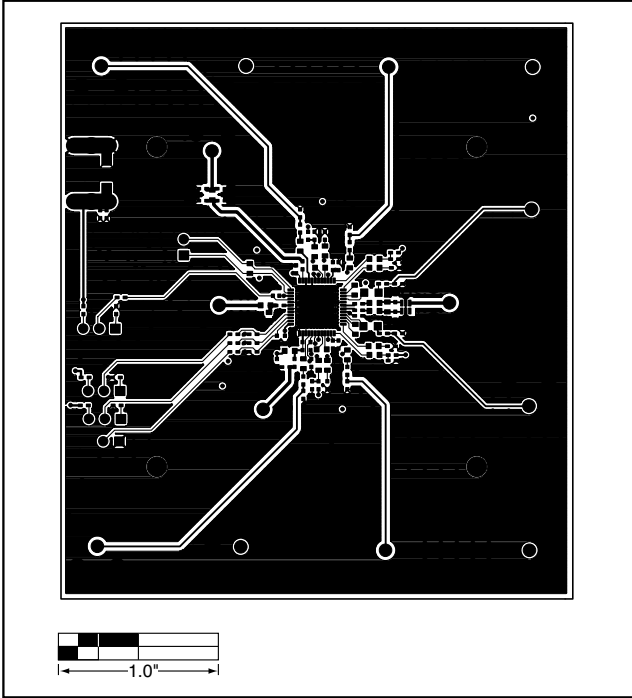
MAX2700/MAX2701 EV Kits PC Board Layout—Component Side
